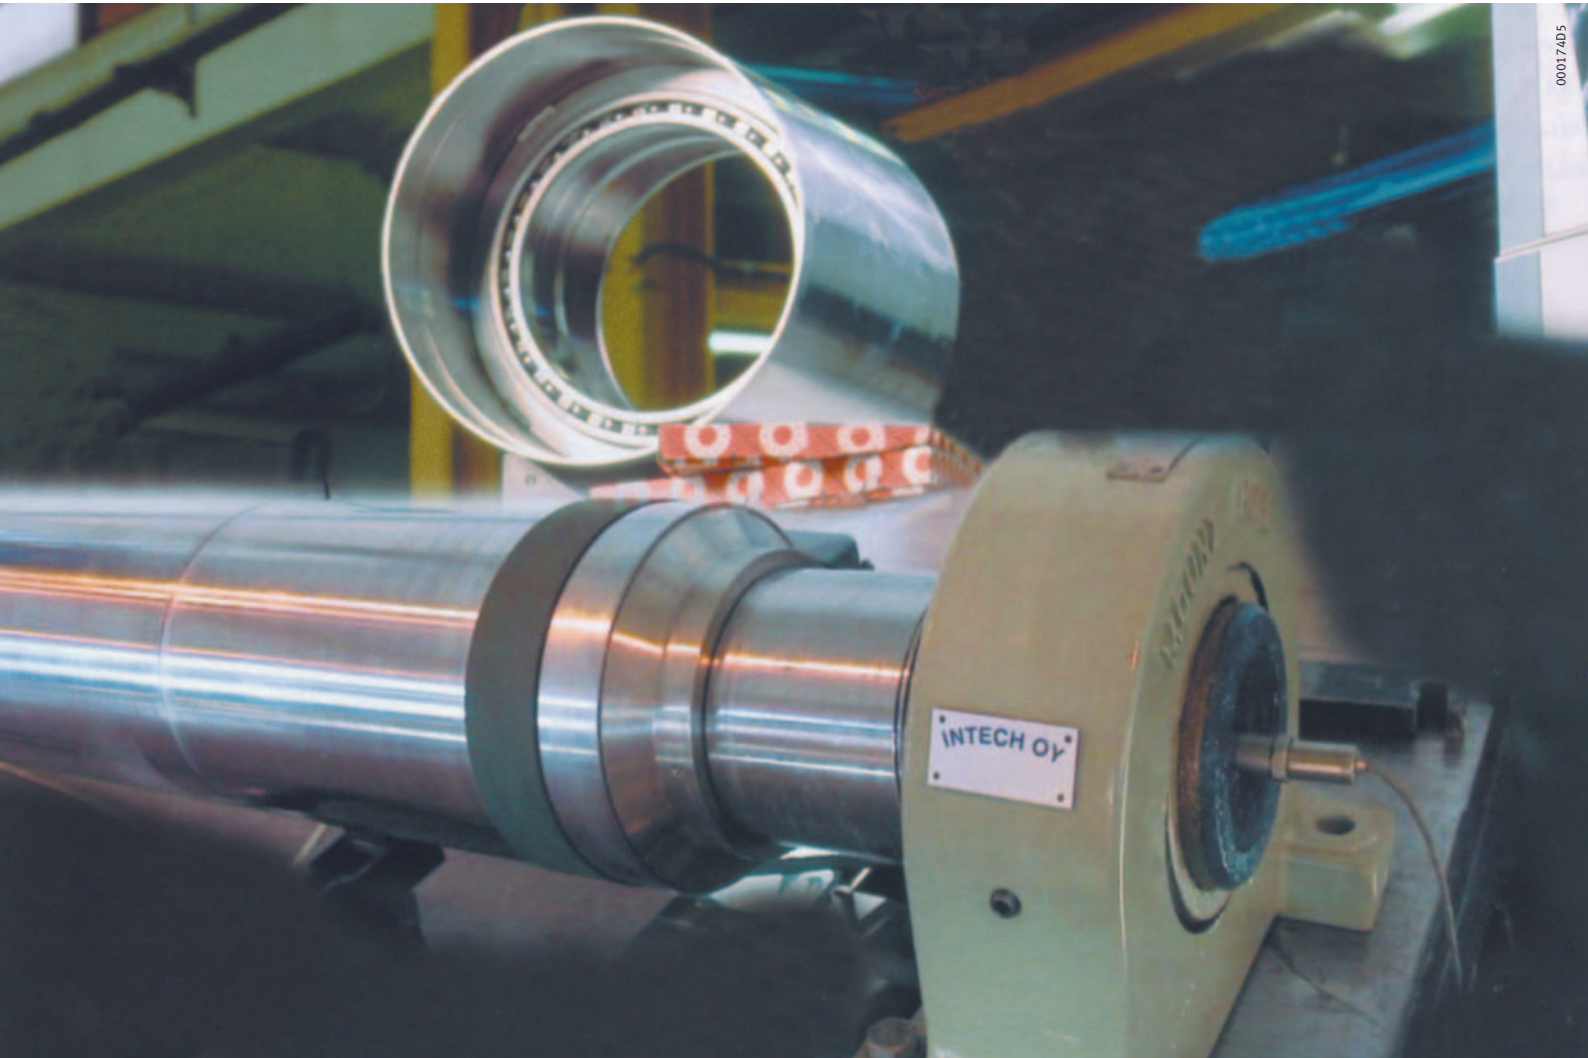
· Spreader roll with hybrid deep groove ball bearings
